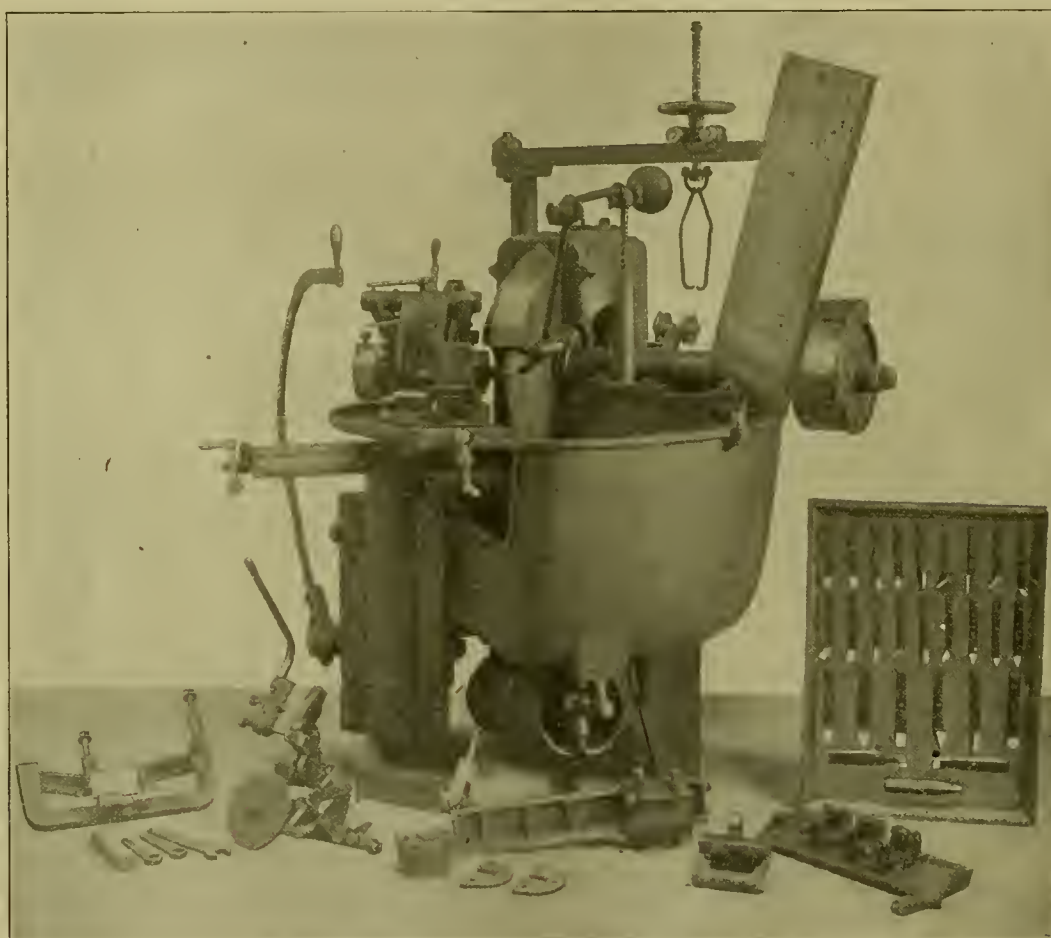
UNIVERSAL TOOL-GROUNDING AND SHAPING MACHINE. WILLIAM SELLERS & COMPANY.
